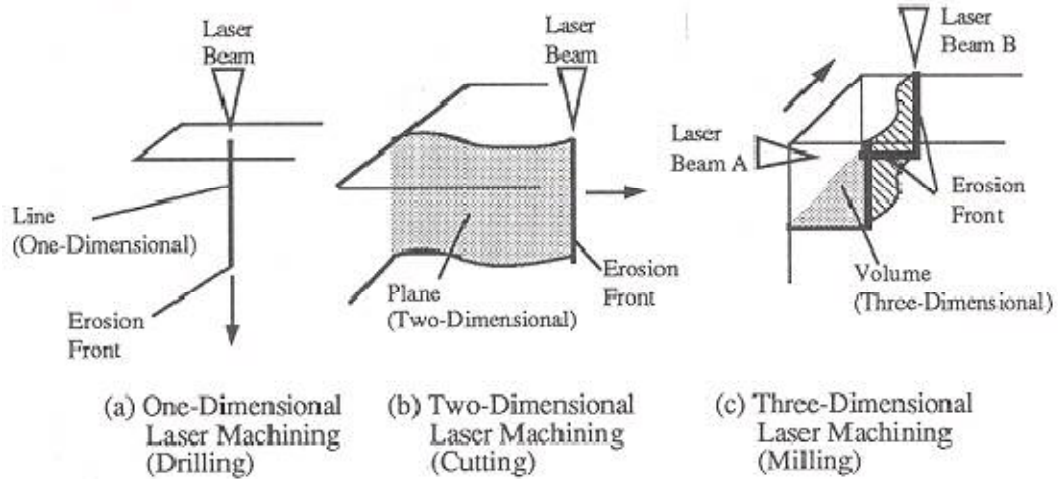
Schematic of one-, two-, and three-dimensional laser machining [26].
